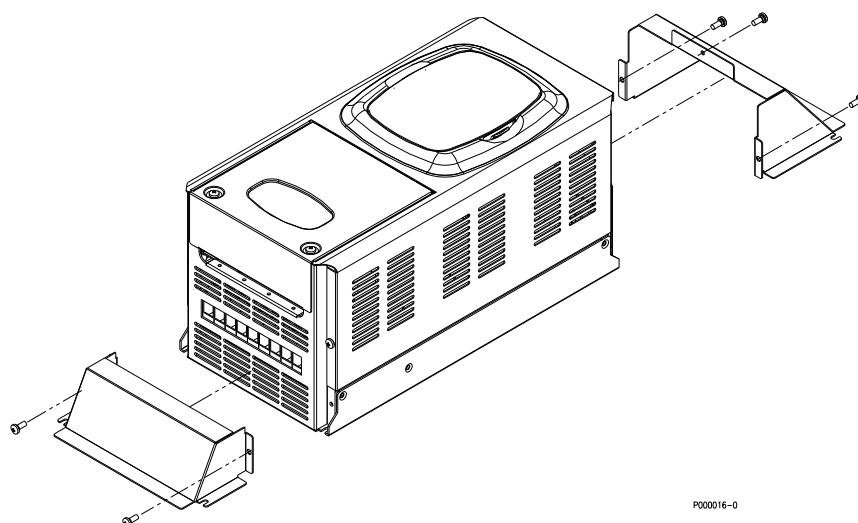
Fittings for through-panel assembly for SINUS PENTA S05
